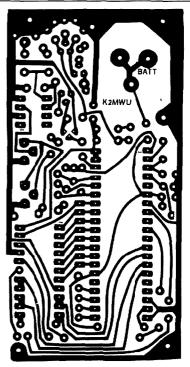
Printed circuit pattern for the autodialer. A drilled and plated PC board is available from the source indicated in the parts list.
